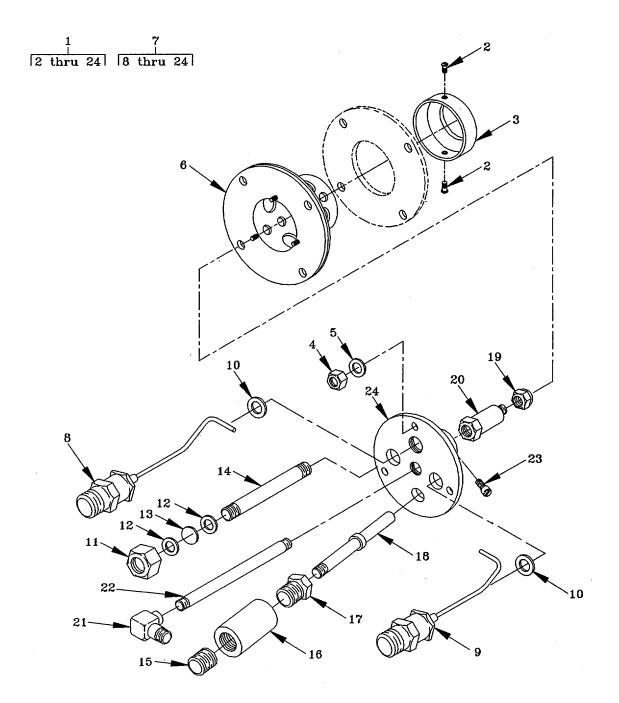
BURNER HEAD ASSE1MBLY (SHEET 1 OF 2, MODEL M80)
